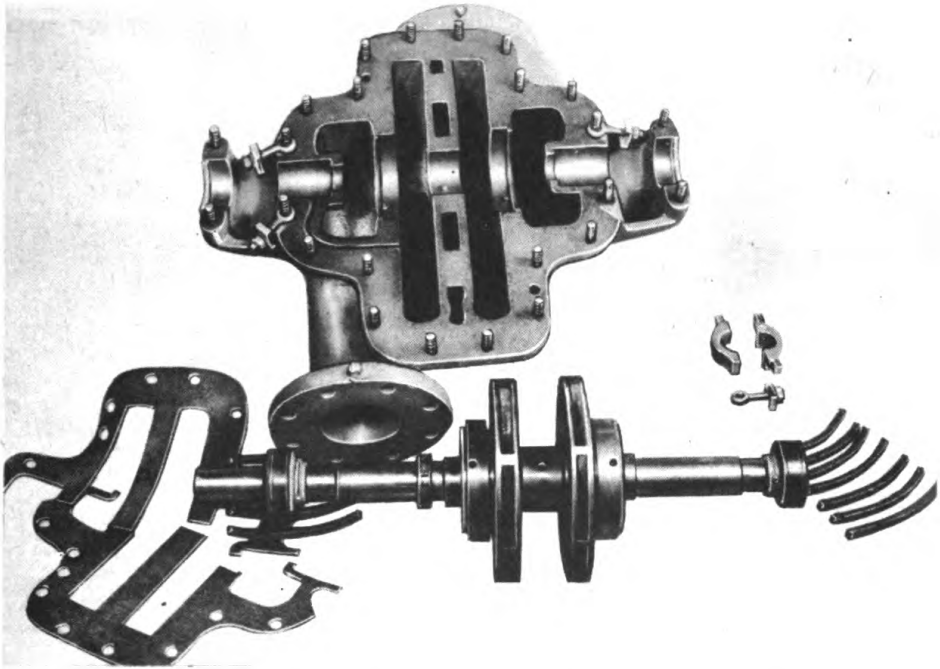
A—Assembled Rotating Element Ready for Installation in Lower Shell Half
